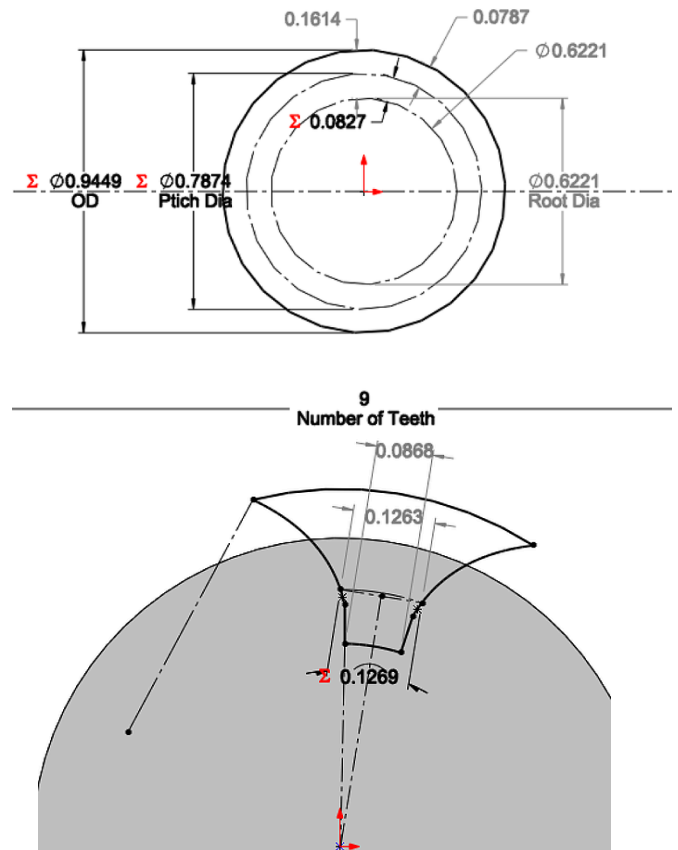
SOLIDWORKS SKETCHES FOR INVOLUTE CURVE
